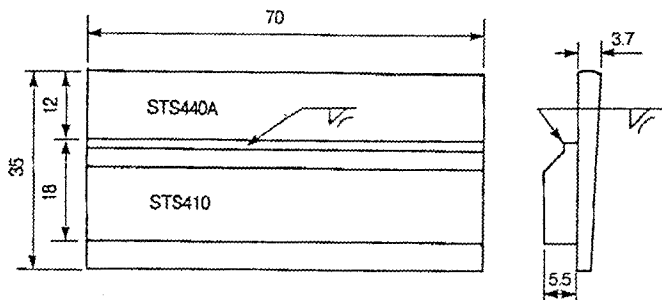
Specimens for lap joint by TIG melt run welding
